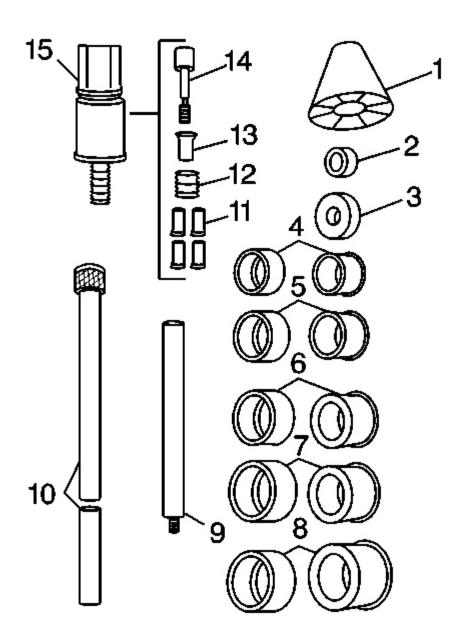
View Of J 33049 Camshaft Bearing Service Kit Components Courtesy of GENERAL MOTORS CORP.
